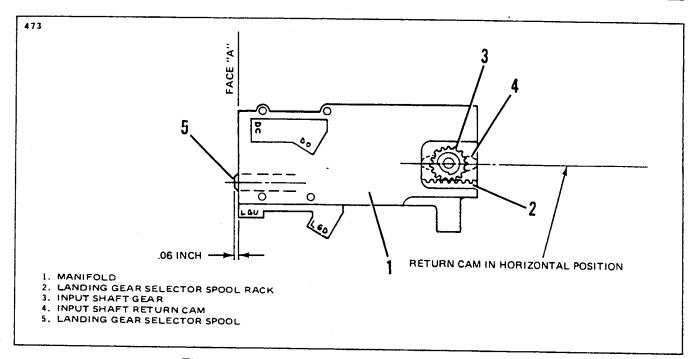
Indexing of Selector Spool (Wiebel Tool)
